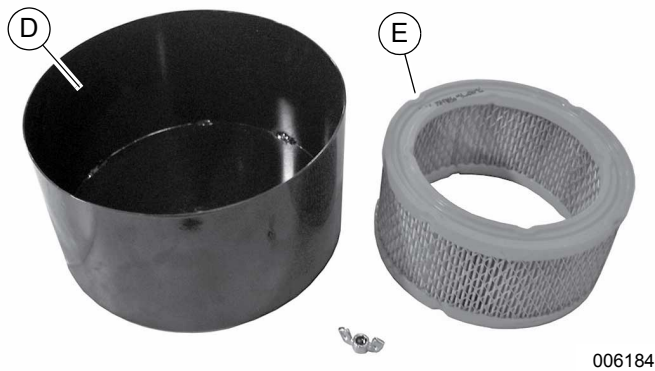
Remove Air Cleaner Element—2.5L Engine
